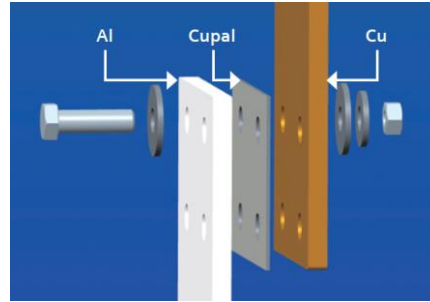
Connection of aluminum and coppers bars with cupal sheet
